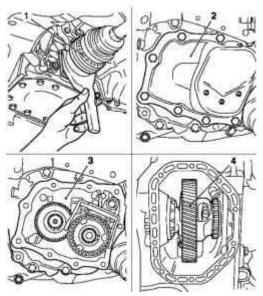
Removal of the differential: 1 - shafts of the wheels 2, 3 - back cover, 4 - differential
